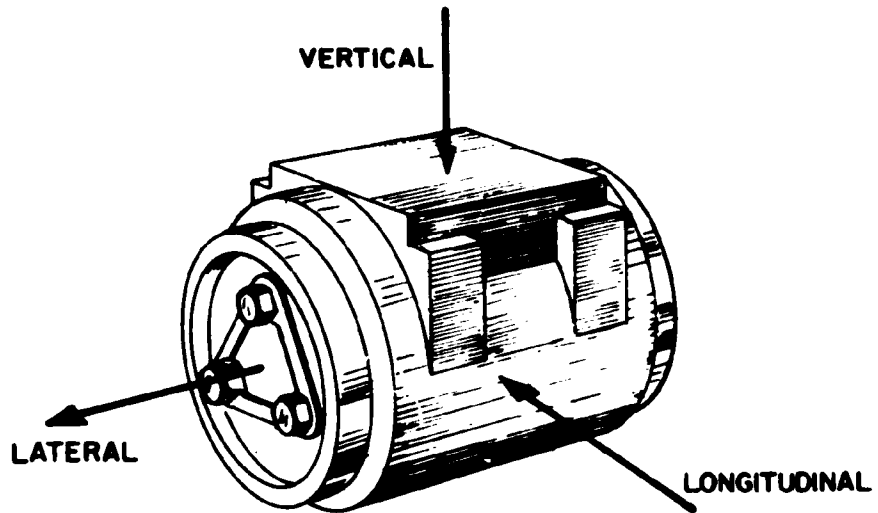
ROLLER BEARING ADAPTER AND BEARING LOADS FROM SIDE FRAME PEDESTAL
